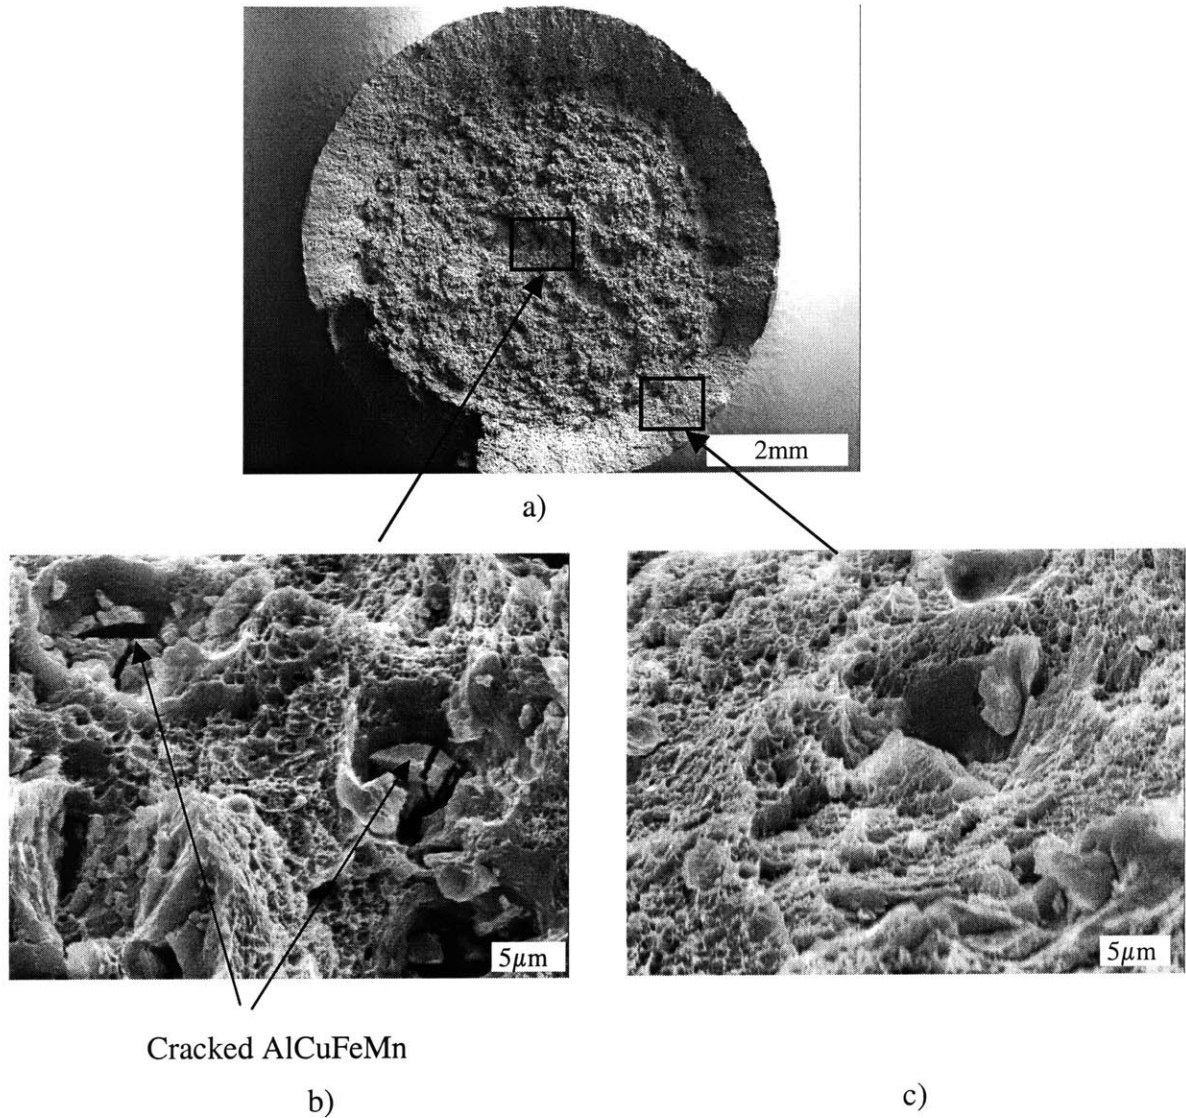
Fractograph showing dimples in the notched tensile specimen
